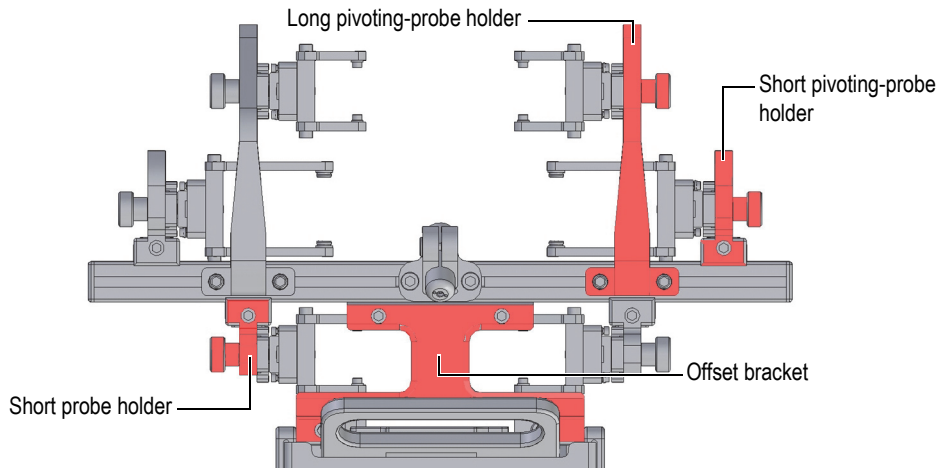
WeldROVER—example of a three-pair probe configuration
